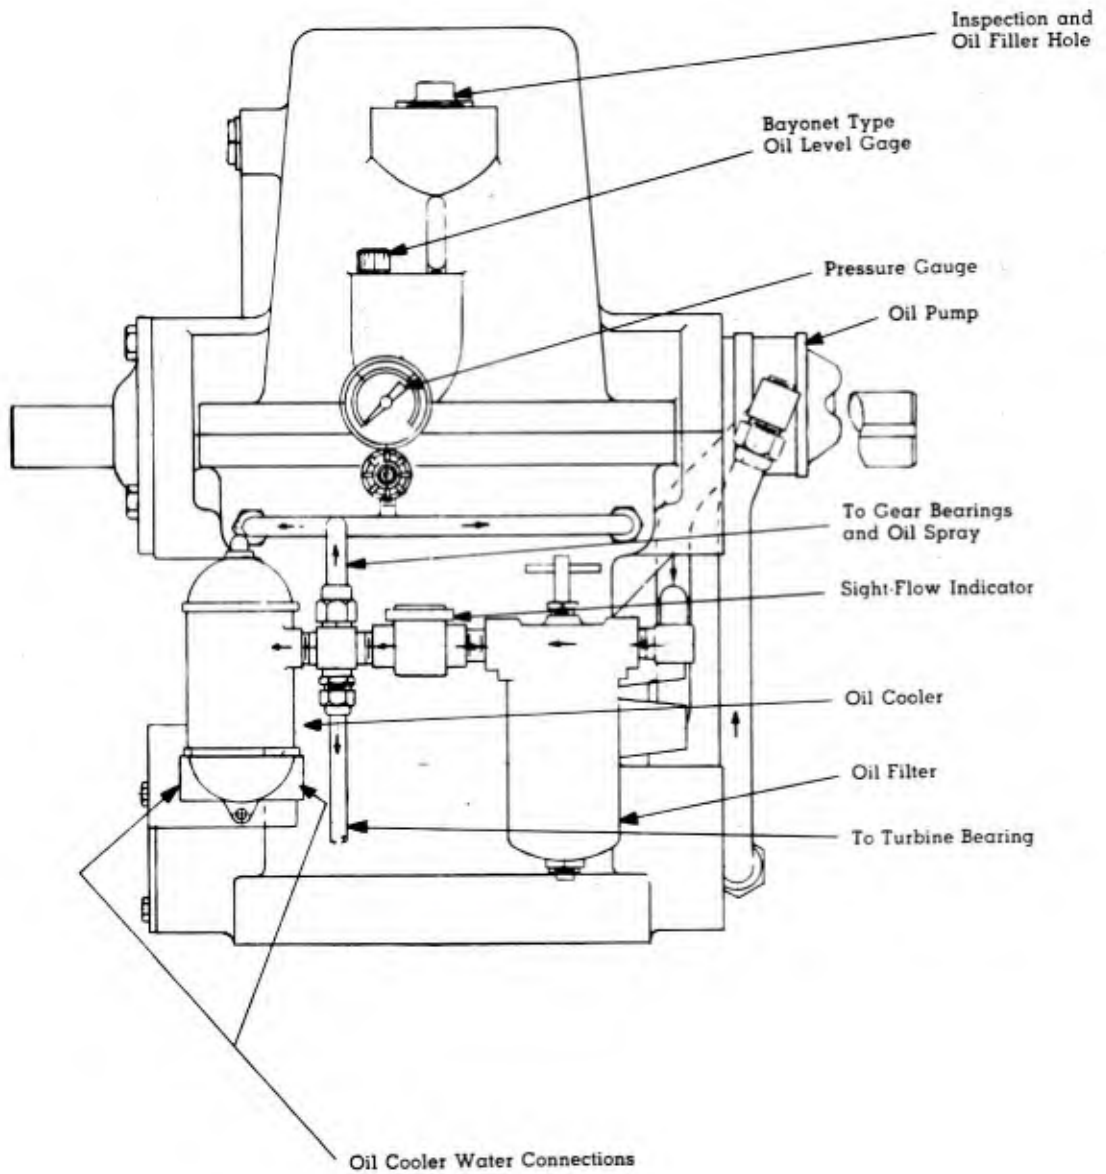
(A)--Elliott lubrication arrangement drawing
